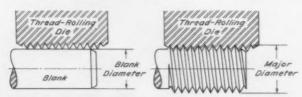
(Above) As the thread-rolling die penetrates the surface of the blank to form the thread roots, displaced material flows outward to form the crests.
